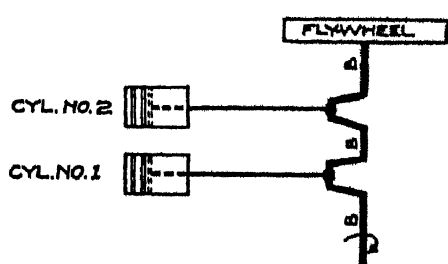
Crankshaft arrangement for two-cylinder side-by-side type engine.
